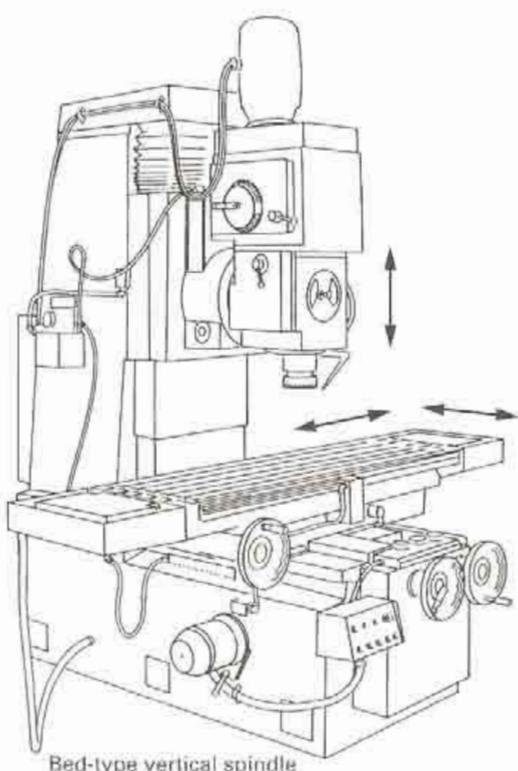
Bed-type vertical-spindle heavy-duty production machine tools for milling usually have three axes of motion.
